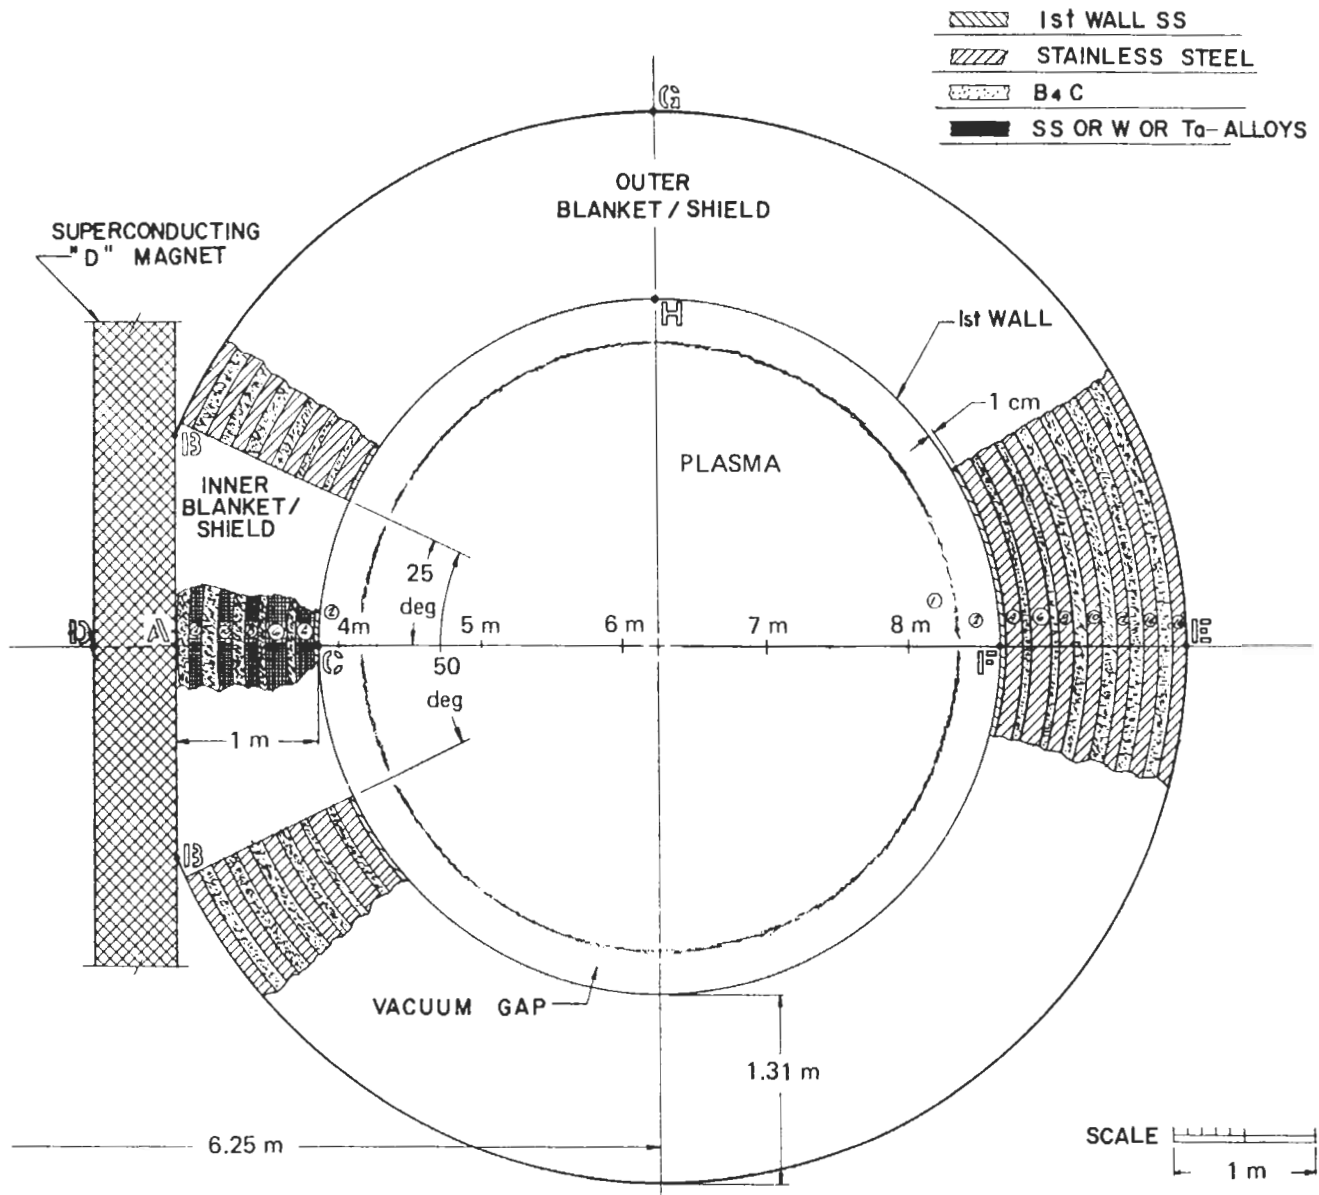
Vertical section of the blanket/shield for the ANL-TEPR reference design. (Toroidal-field coil bore is 7.7 m; the additional space of 59 cm. between the outer blanket/shield and the D-shaped magnet is provided for access, assembly, disassembly, etc.)
